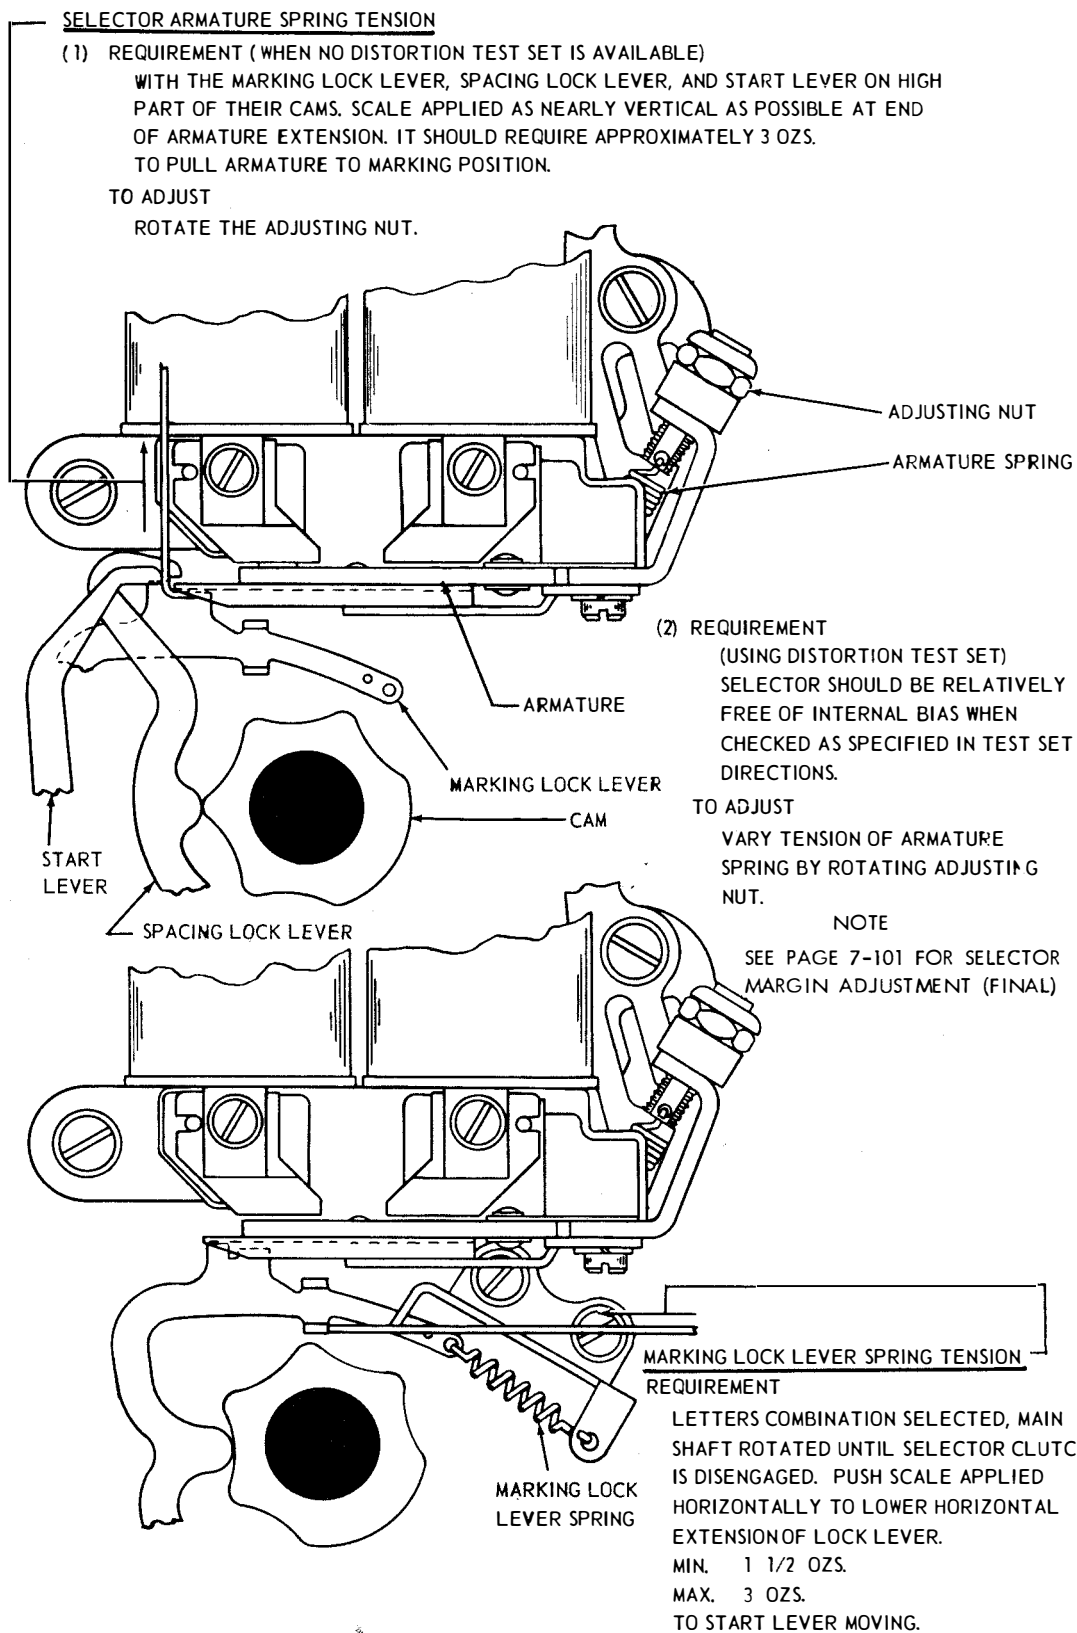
Automatic Typewriter, Selector Mechanism, Right Side View
